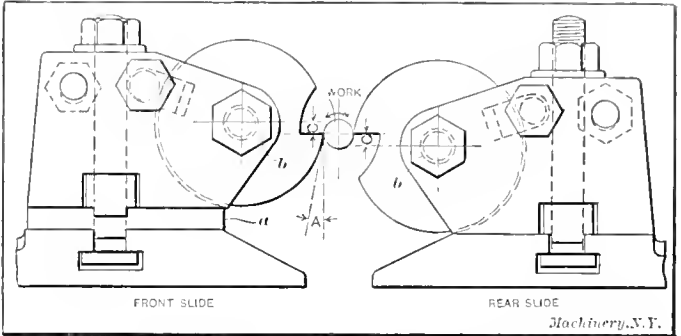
Circular Form Tools and Holders showing Location of Center of Tool in Relation to Center of Piece being formed
